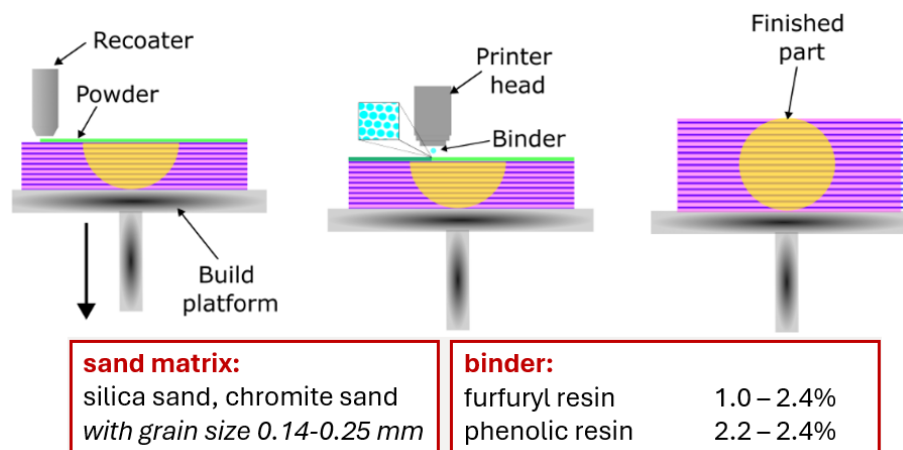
Scheme of the sand 3D printing process using the binder jetting method [1-2].
